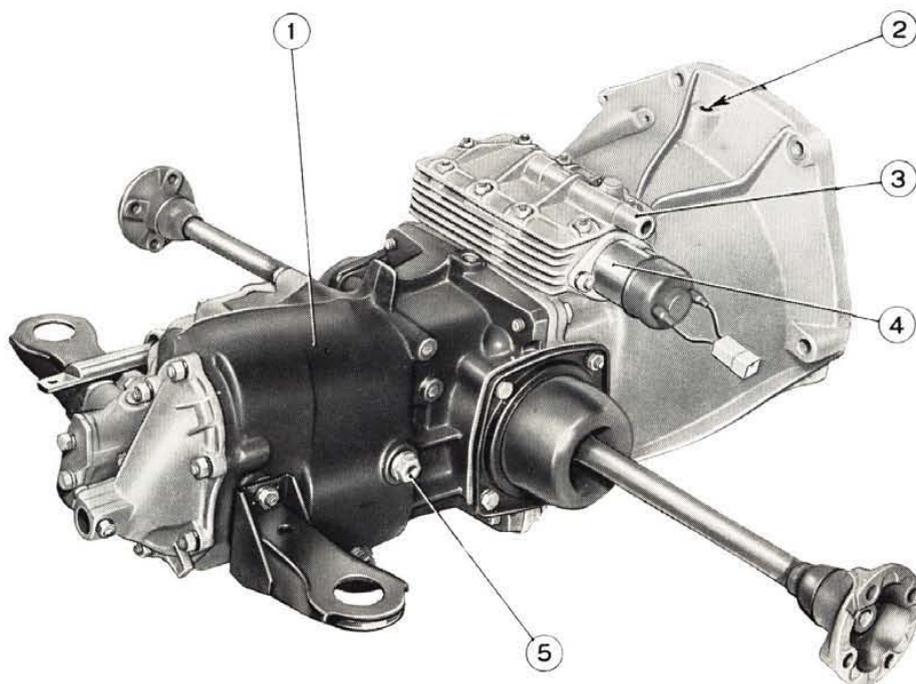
Transmission unit with hydraulic torque converter - left hand view.
